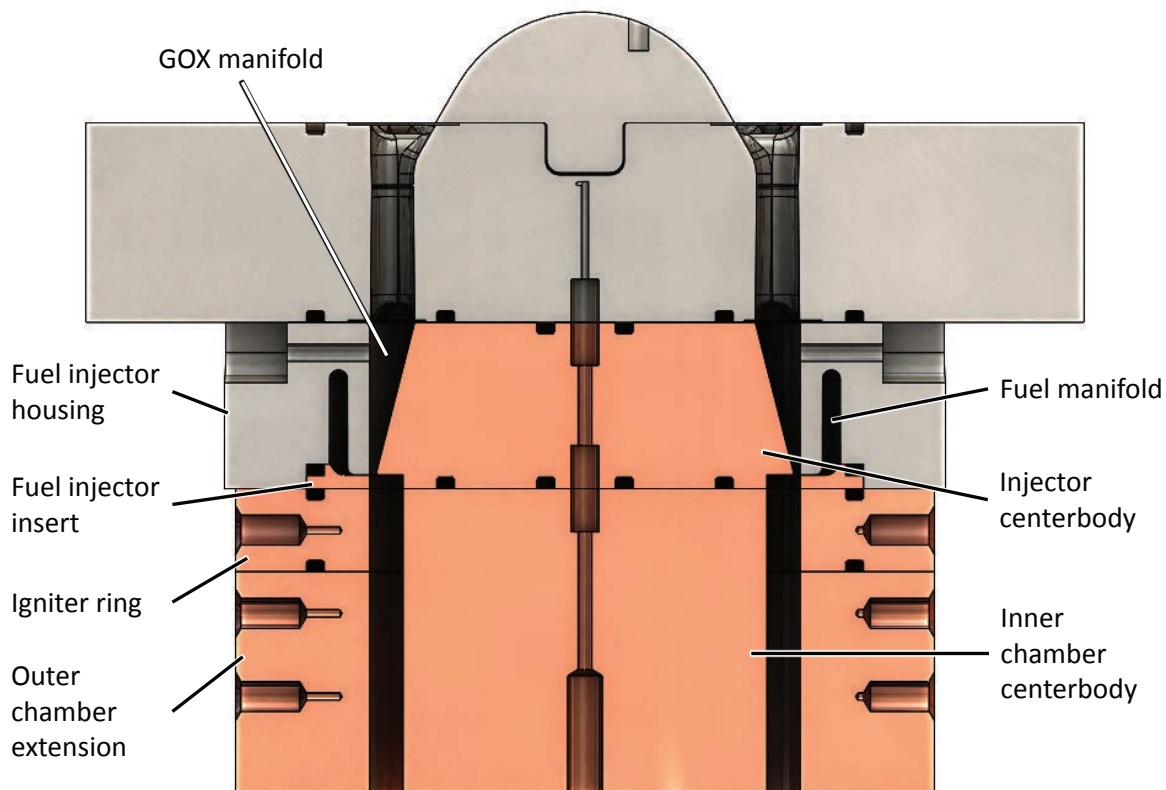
Longitudinal section of RDE v1.4 showing major components.
